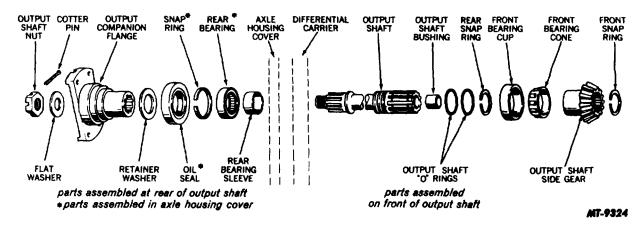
Output Shaft and Axle Housing Cover Components (Exploded View)
